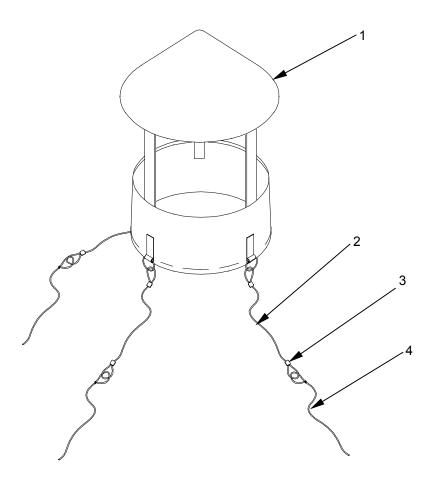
Group 01 Stack Cap Assembly 0026 00-(1 Blank)/2
